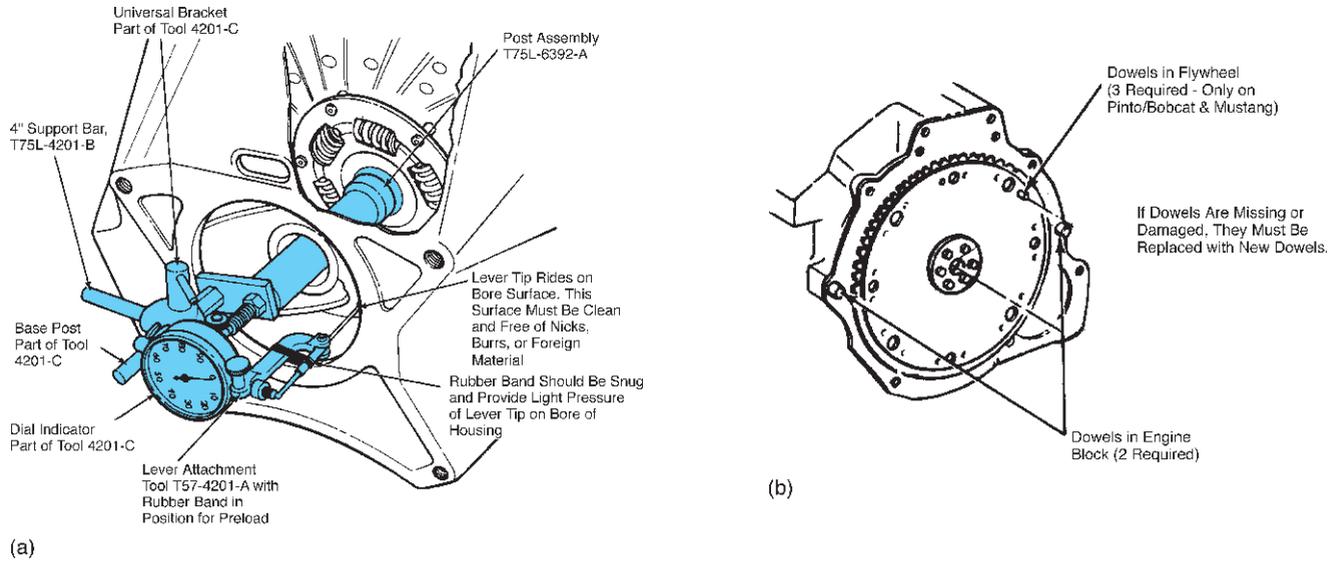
(a) This dial indicator has a lever or wiggle bar added to check clutch housing bore runout. (b) Excessive runout can be caused by damaged or missing dowels; if the dowels are good, runout can be corrected by installing eccentric dowels. (Courtesy of Ford Motor Company)
